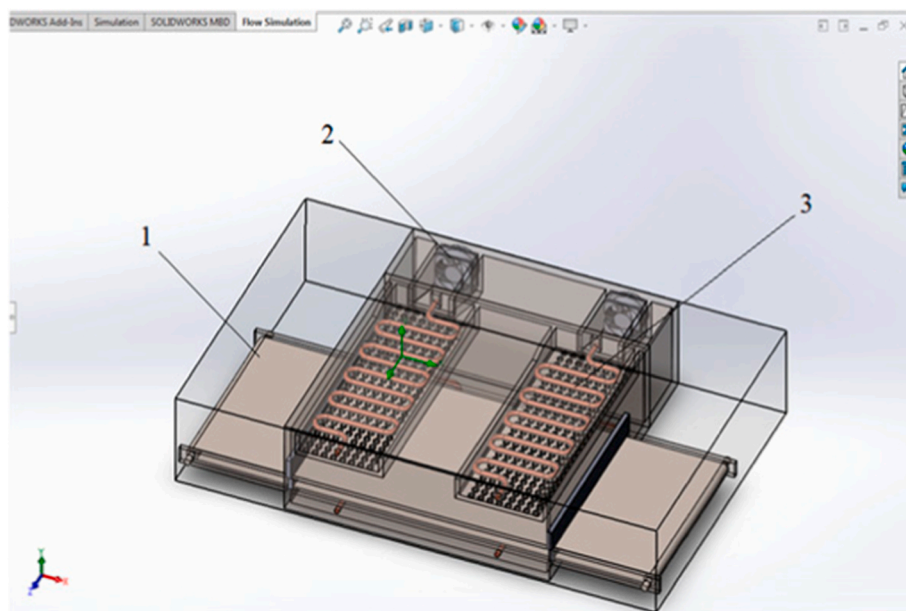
The assembly used in airflow analysis by Constantin et al. [18]: 1. conveyor; 2. fan; 3. electrical resistance for heating.
